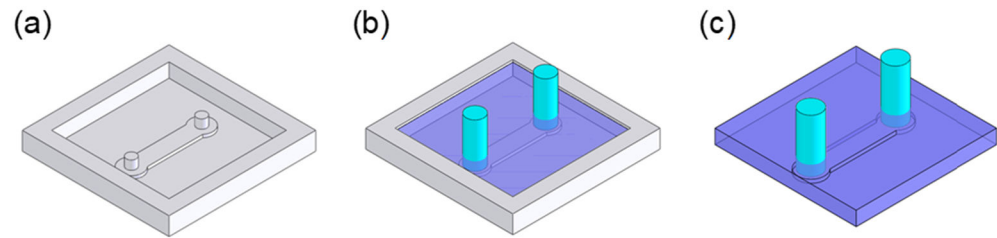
Fabrication steps for the cryo-cooling microfluidic channel structure. (a) Acrylic master mold fabrication using a rapid prototyping machine. (b) Silicone tubing insertion and PDMS pouring. (c) PDMS curing and releasing.
